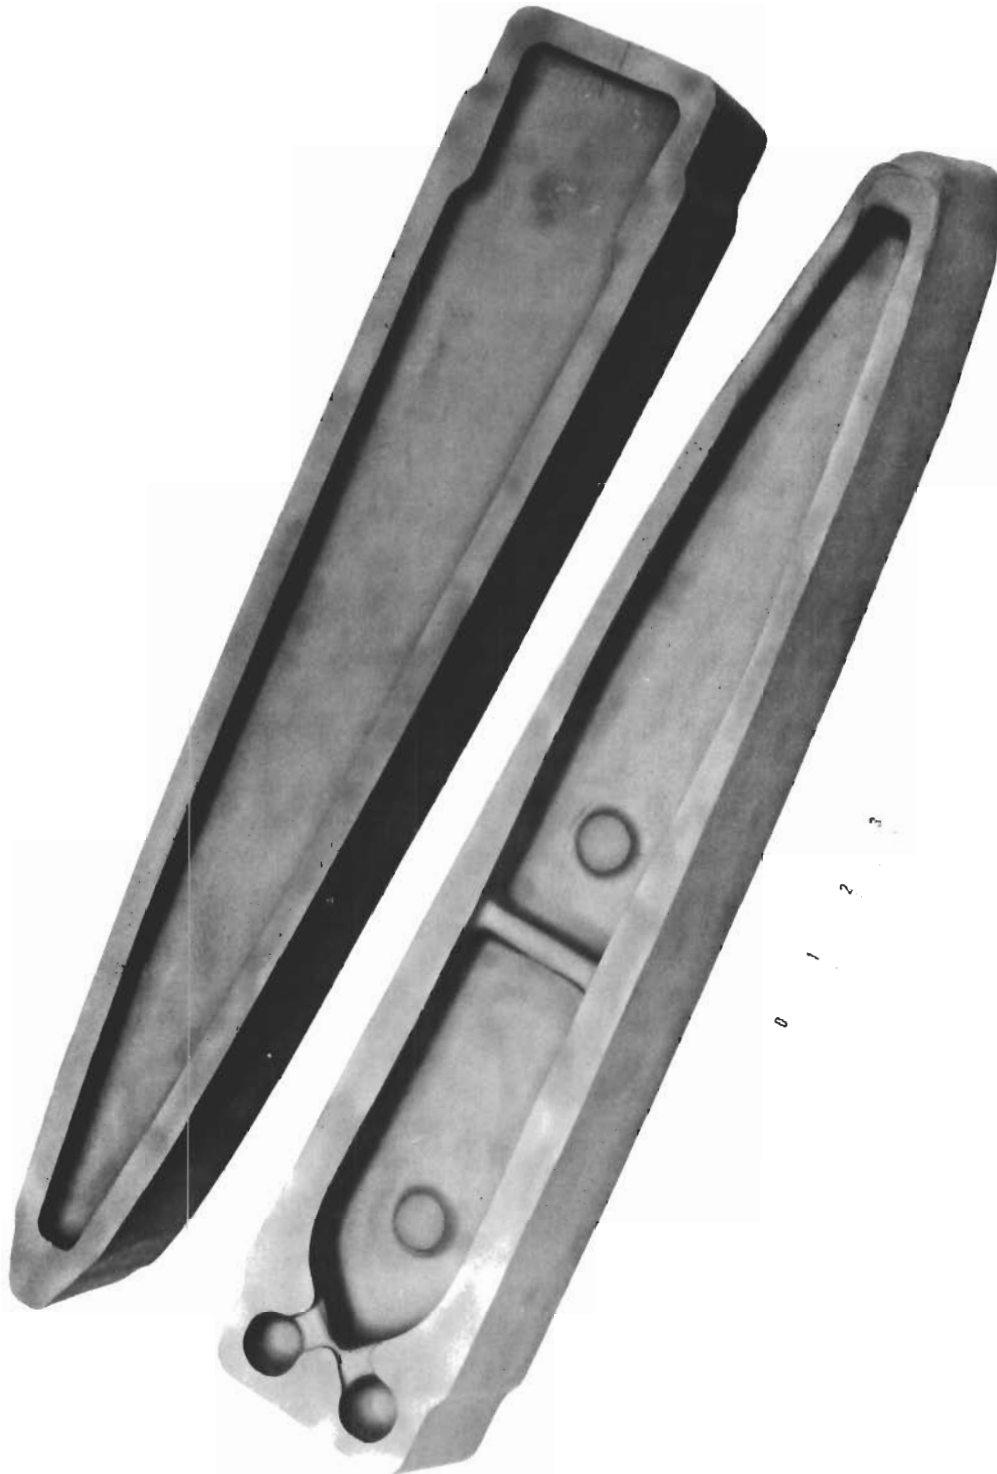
Close-Up of Two of the Inconel 718 Forgings Produced with the 6000 Ton Hydraulic Press and Delivered to TRW.
